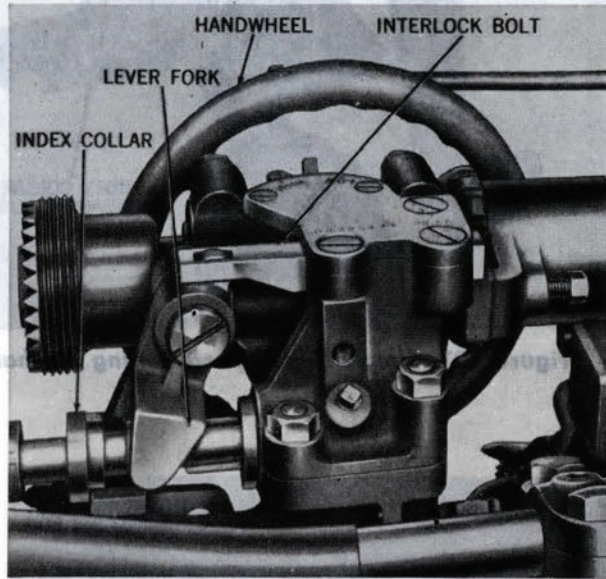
Simple Type Speed Setting Mechanism—Rear View—Spindle IN.
